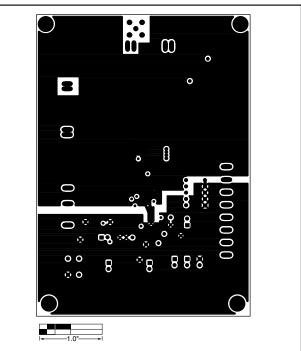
MAX1711 Voltage Positioning EV Kit PC Board Layout—Internal GND Plane (Layer 2)
